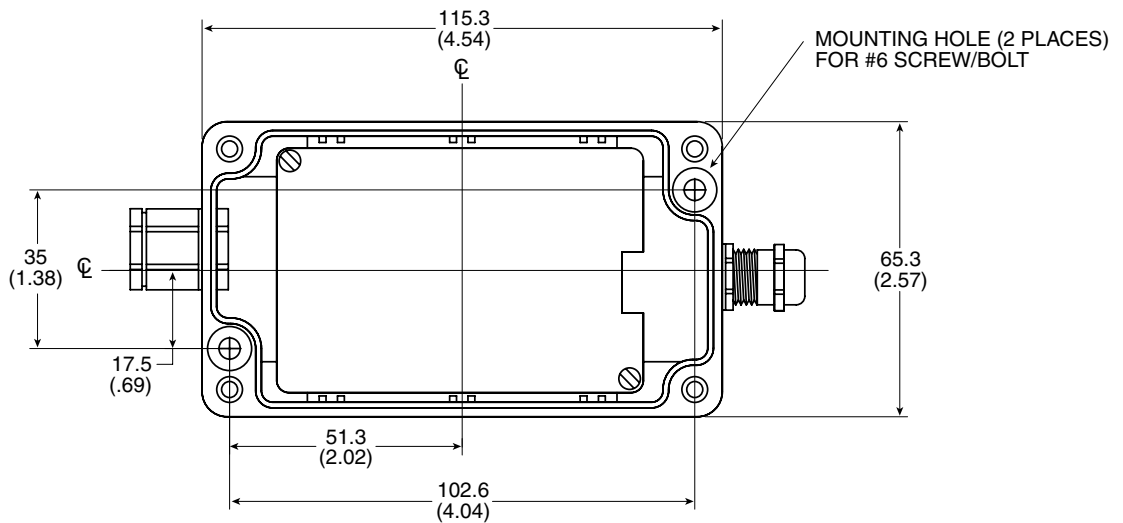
B. - FLSC-45B Mounting Dimensions, mm (inches)
